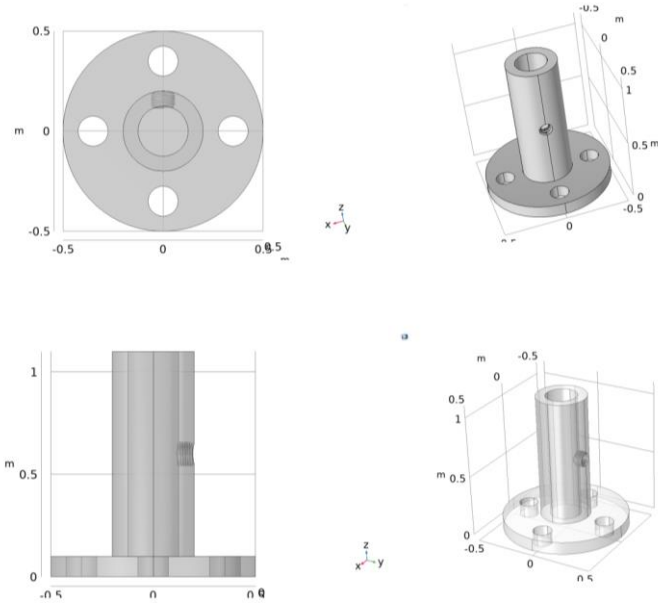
multi views of part(6): customized part connecting main rod and two short stainless steel rods.
